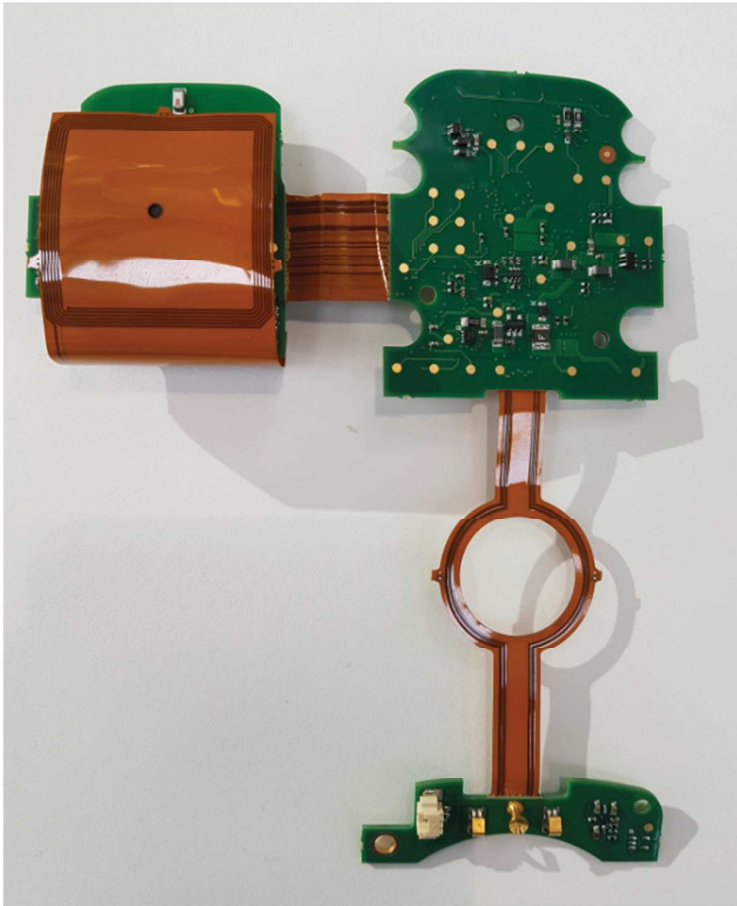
Front view of Radio Module and flexible PCB with radio coil
